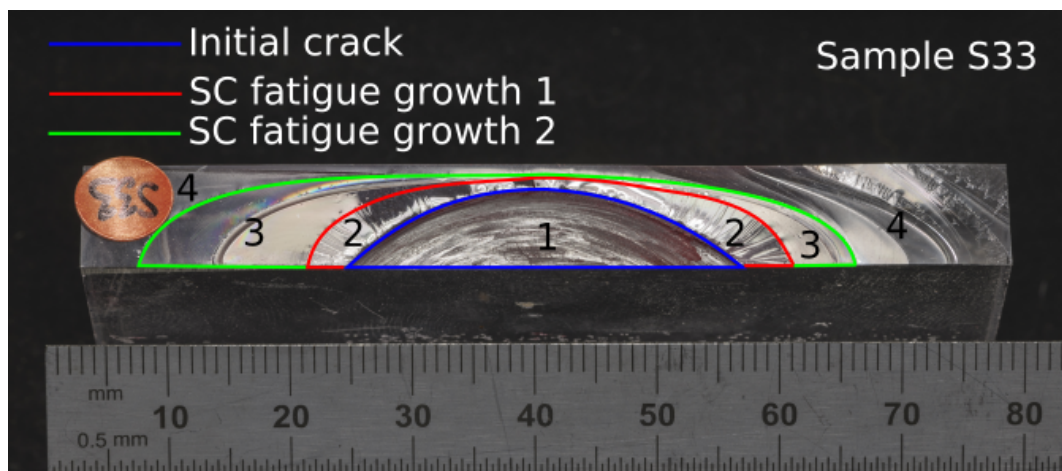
Test on Perspex plate - Fracture surface - Sample S33
